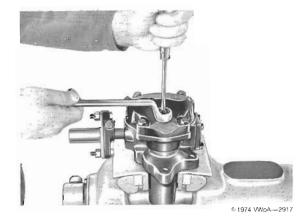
Locknut being tightened while adjusting screw is held stationary with screwdriver.
